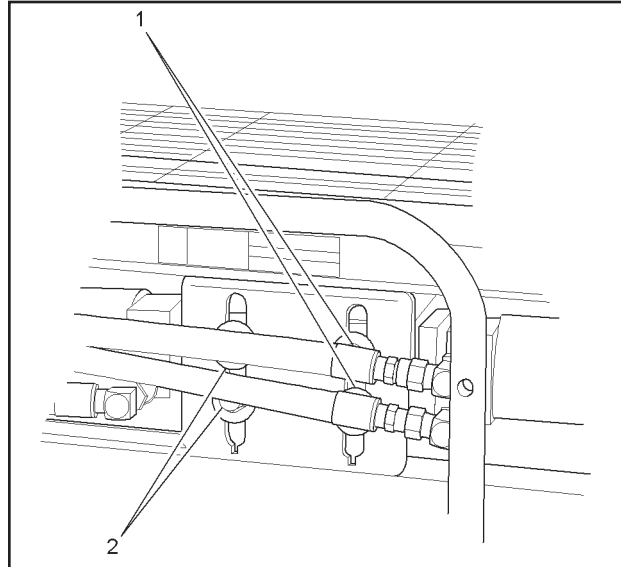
AUGER CHAIN ADJUSTING BOLTS
